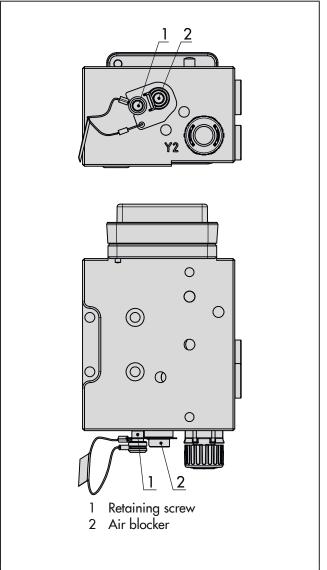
Adapter block for attachment according to VDI/VDE 3847-2
